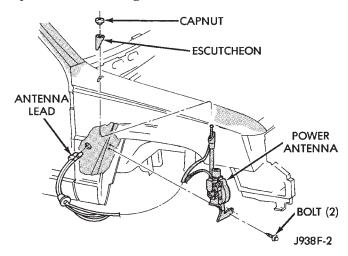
Remove/Install Escutcheon and Antenna Pad
